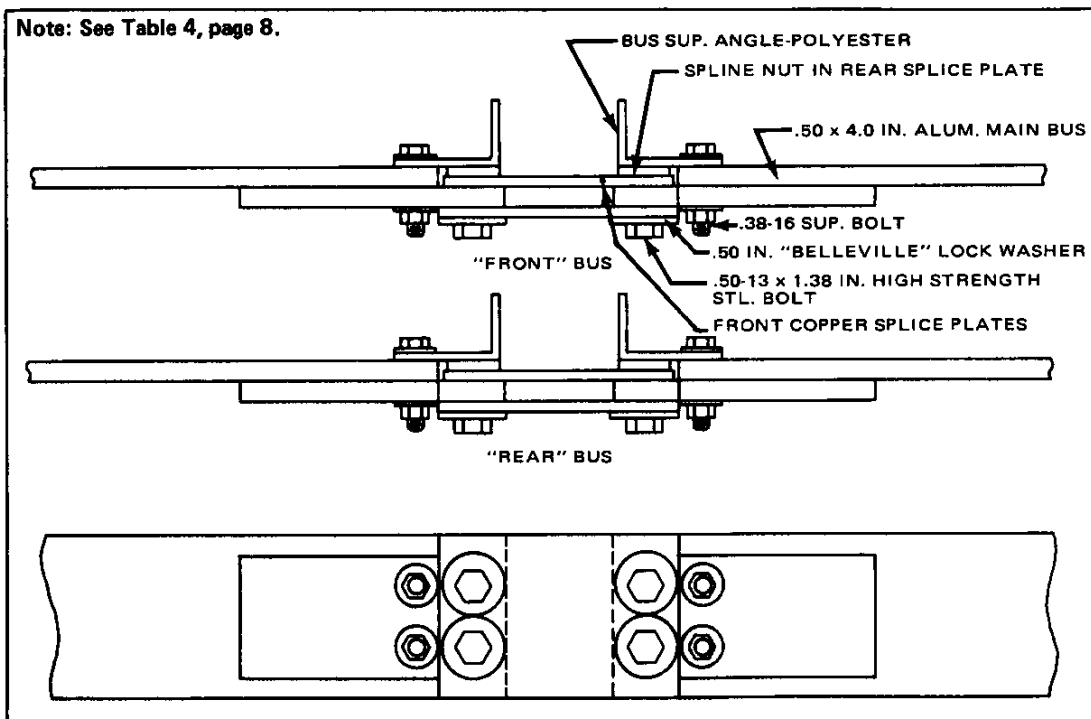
Field Assembly of Joints in 3000 Amp Aluminum Horizontal Bus
